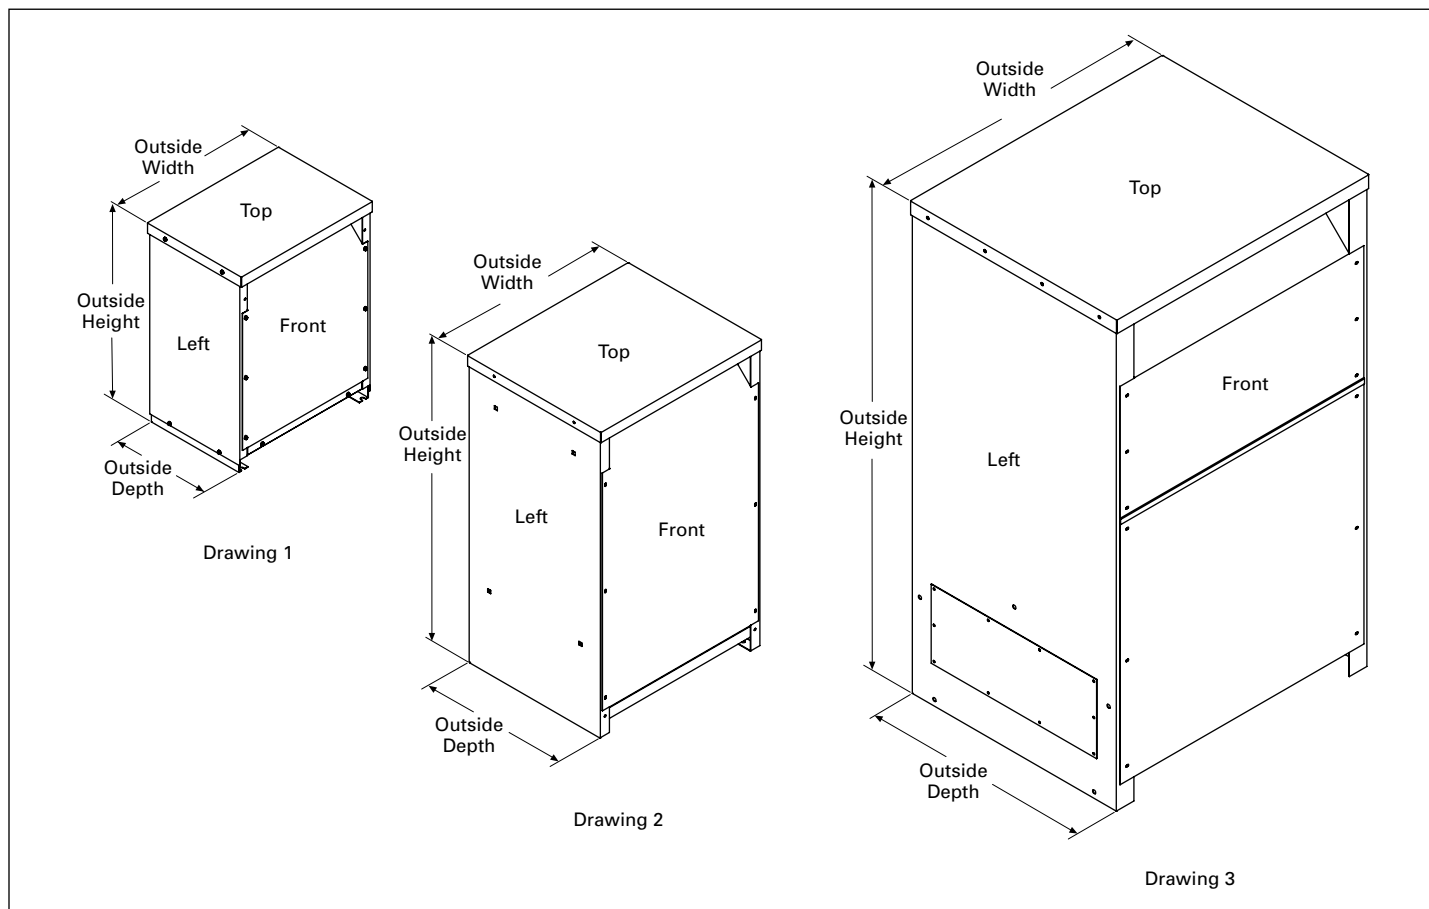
Enclosure Dimensional Drawings—Ventilated Transformers
